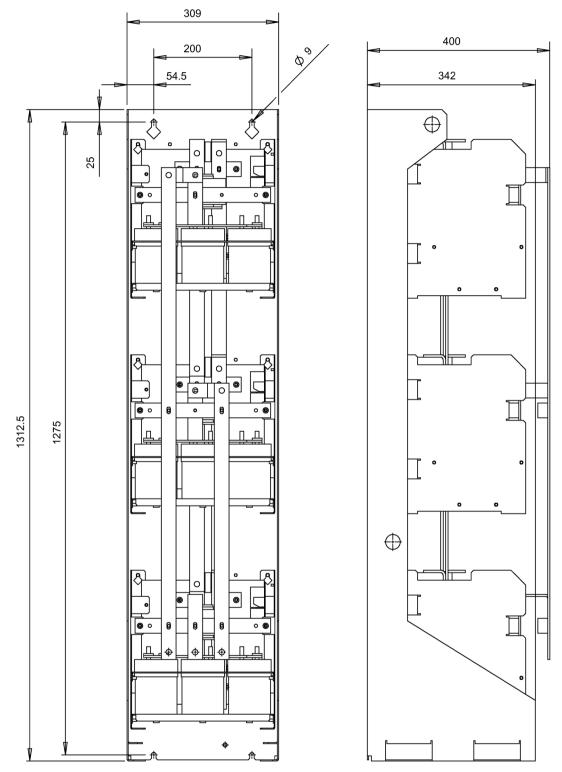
Dimension drawing of the voltage peak limiter, type 3
